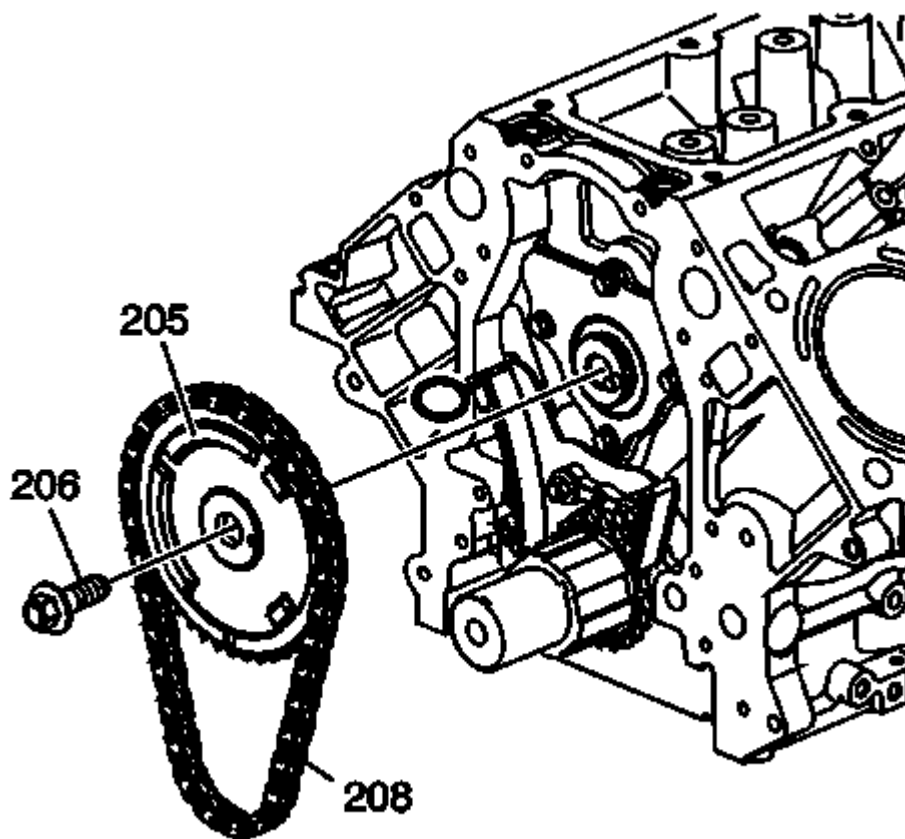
View Of Camshaft Sprocket & Timing Chain
